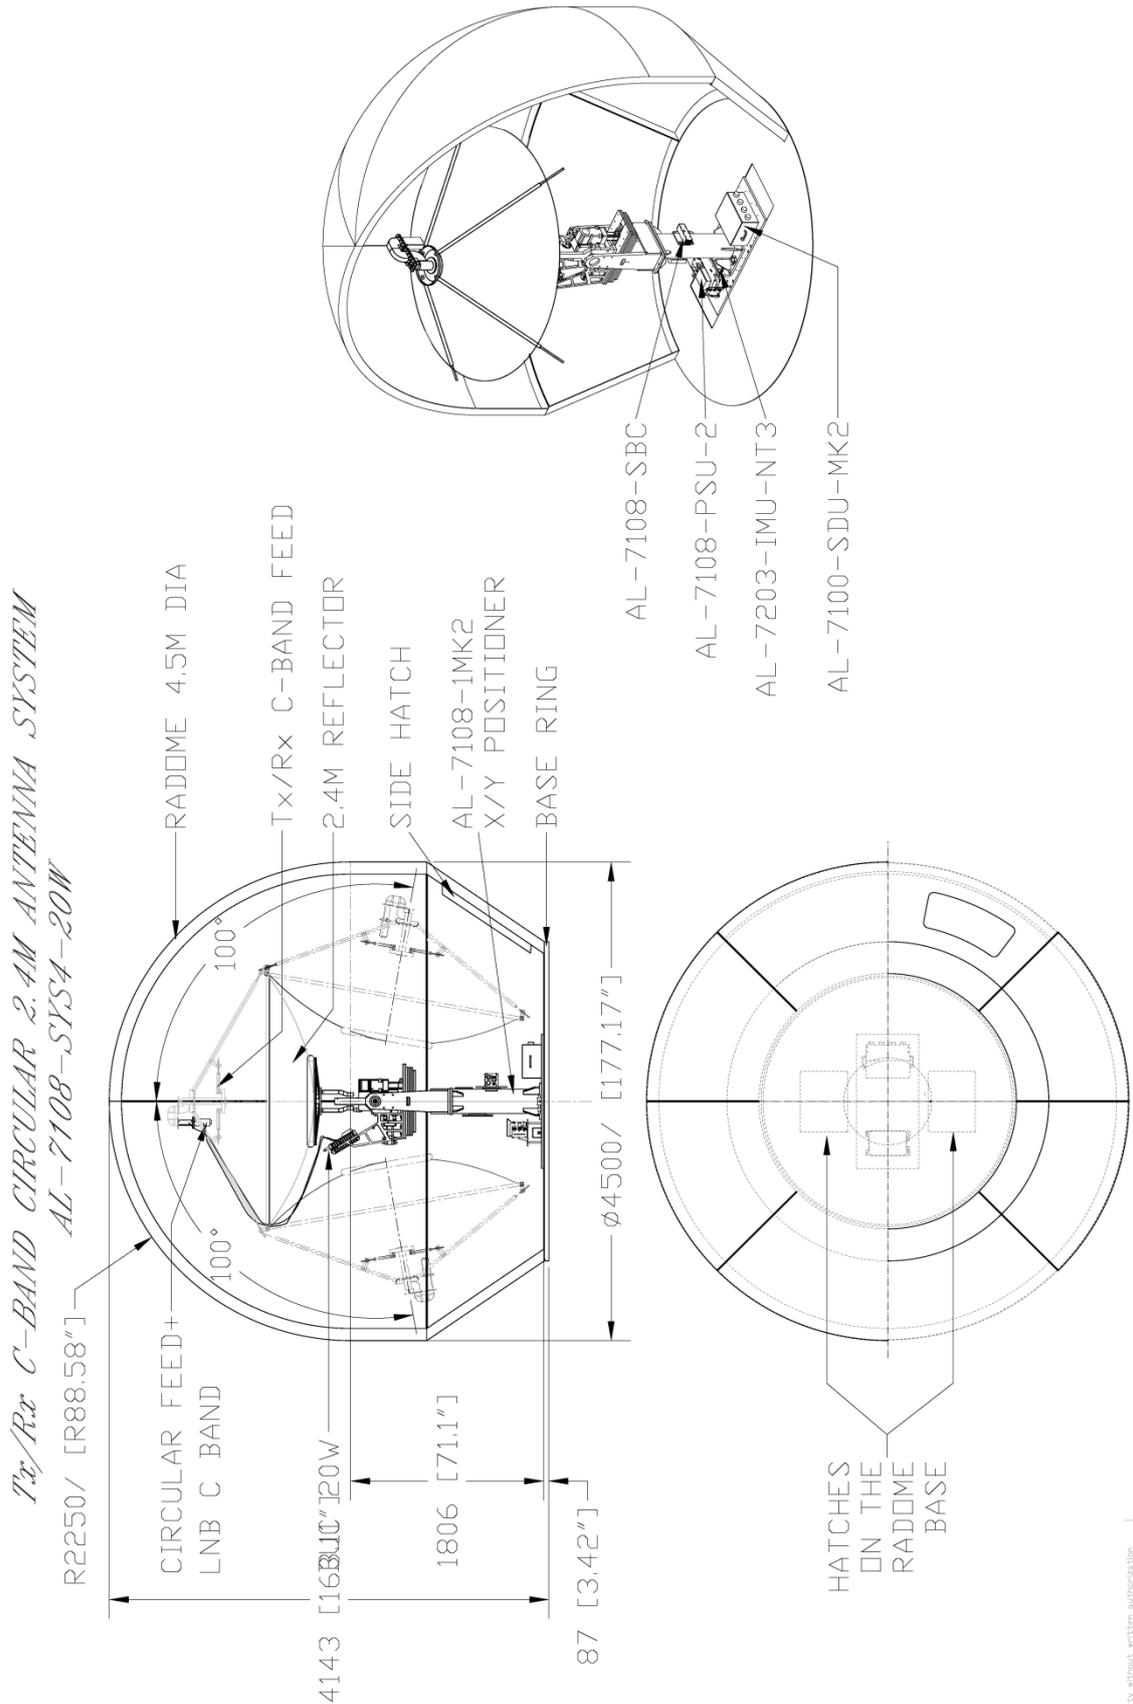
20/40W Configuration - Above Deck Equipment (ADE) Layout and Dimensions
